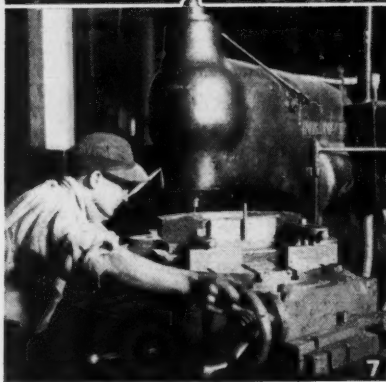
Profiling a die section on a Milwaukee milling machine with a vertical milling attachment. Fig. 7—Using a Milwaukee vertical mill to mill an elliptical groove in the surface of a die. Fig. 8—Boring bushing holes in a bushing plate for a jig. There are 83 holes in this plate to be bored.
